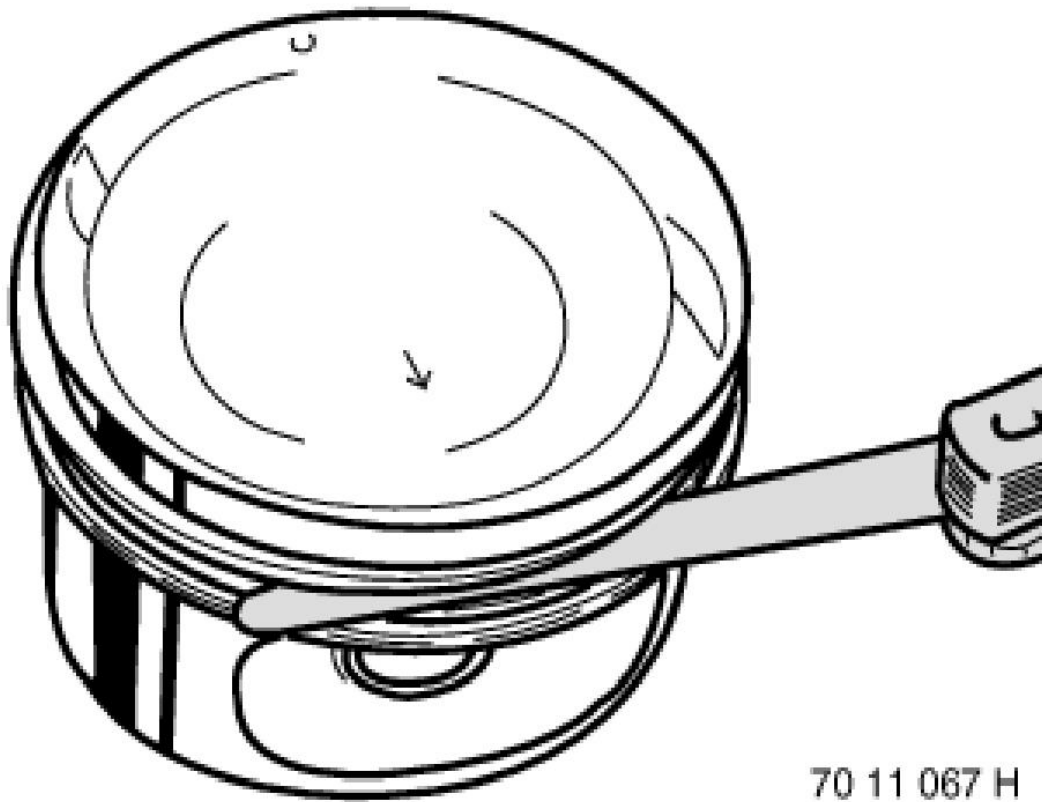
Measuring Axial Clearance Of Piston Rings In Piston Ring Groove
